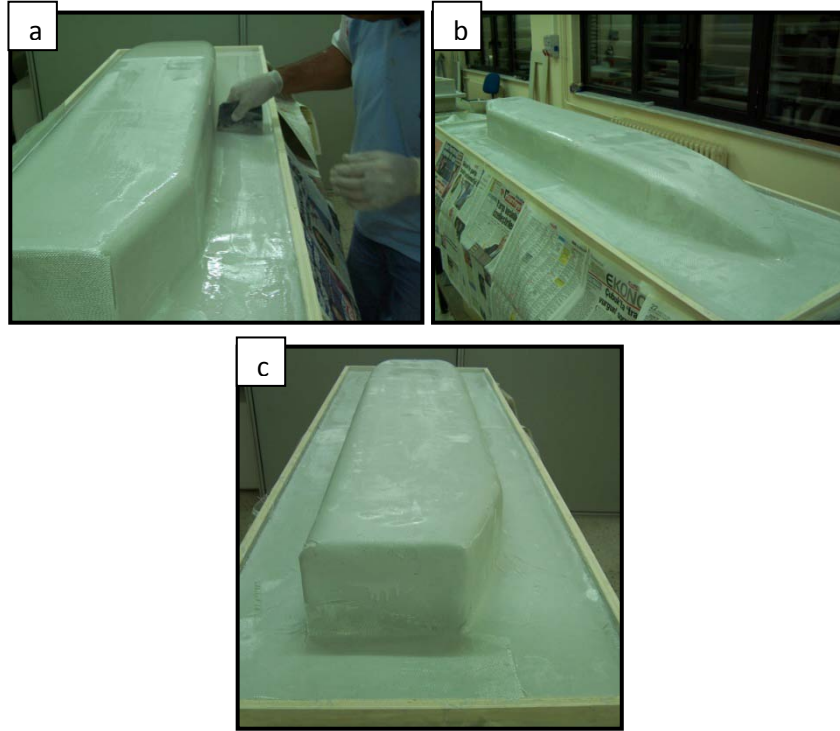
Smearing mold resin over the fibre-glass fabric (a), Back view of the female mold before the wooden skeleton is built (b), (c)
